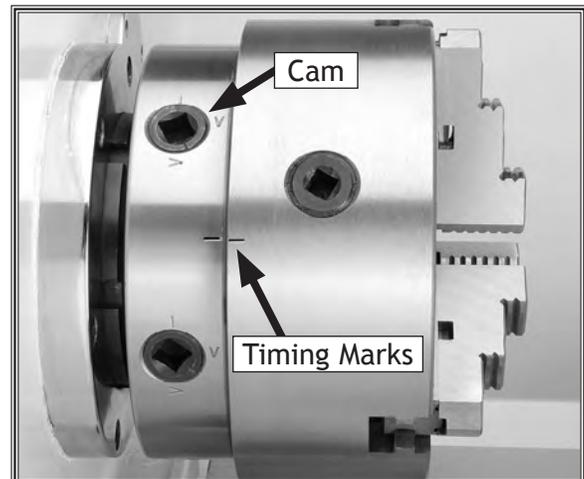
Tightening the camlocks when the chuck is in time with the spindle.
